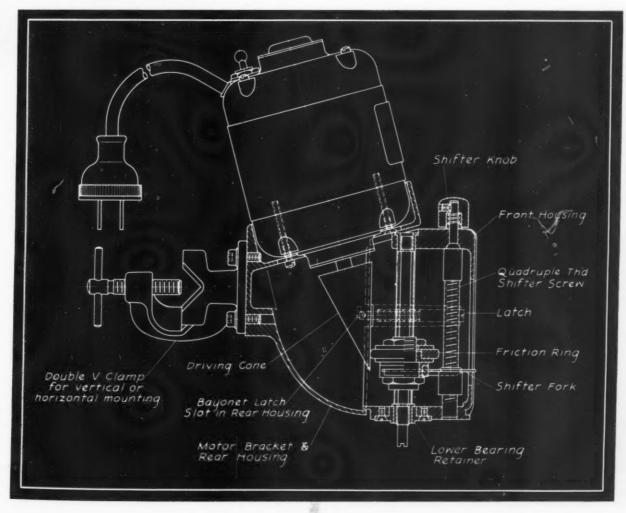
Below—Arrangement of cone drive. Shifter fork friction ring and driving cone are shown together with latch design serving dual purpose of closing unit and maintaining friction on drive
